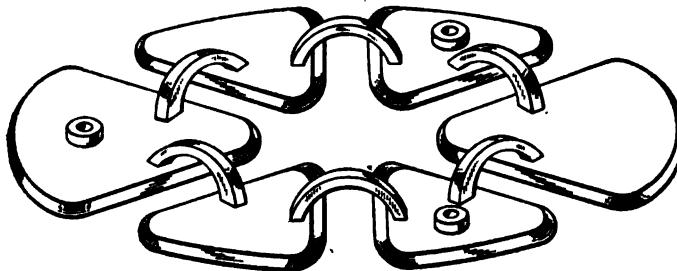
Assembled Lifting Plate for Six-Arm Pulley
